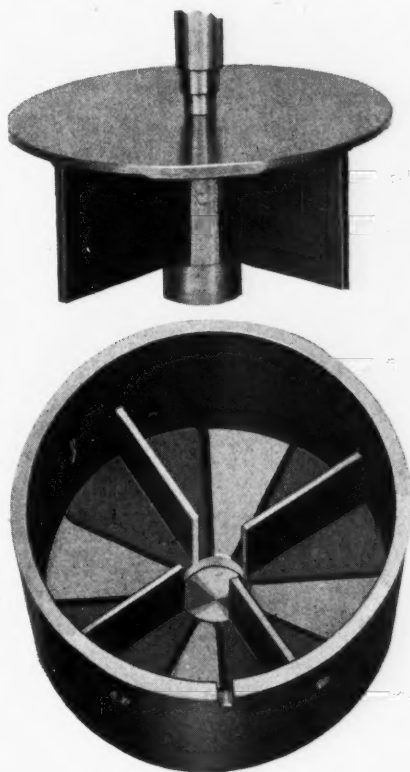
The oil-damping connection between gear and turntable shaft. Above, oil cup; below, vane-bearing end of turntable shaft
